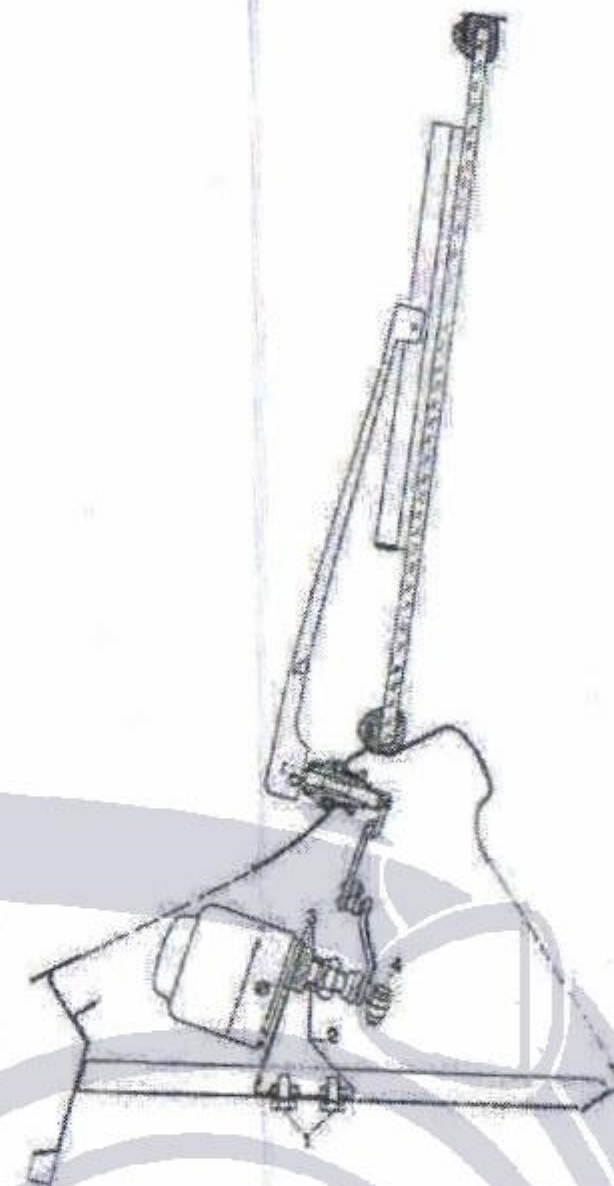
Windshield wiper assembly with blade rotation angles.
